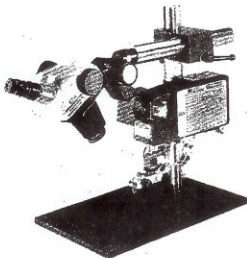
Model 50F/UB Light Force Weld Head shown with optional Optic.
